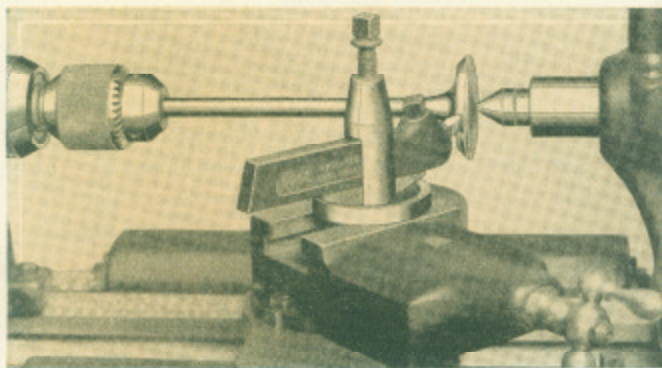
Refacing a Valve at 45° Angle by Turning, Using a 3-Jaw Drill Chuck to Hold Valve
